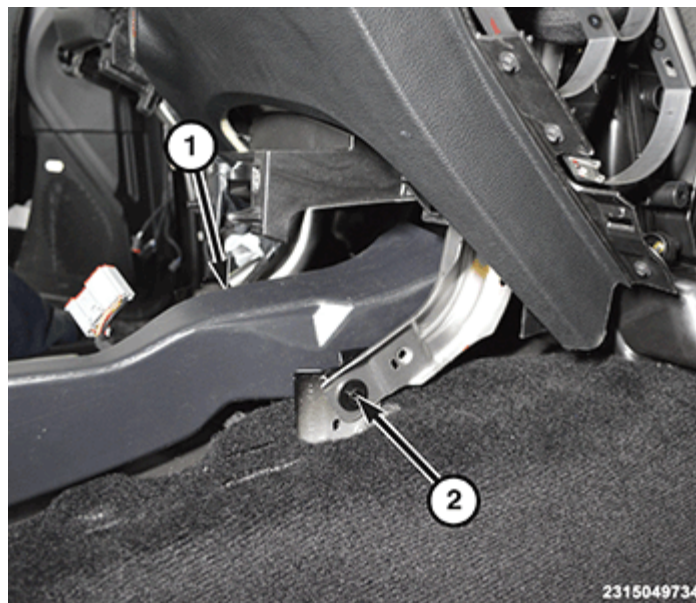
Floor Duct & Instrument Panel Center Bracket Bolt
